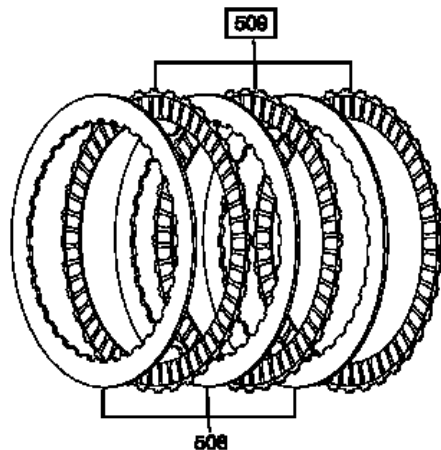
3-5 Reverse Plate Assembly (Gen 2) 24260697
